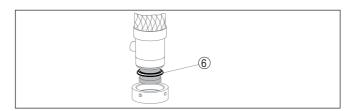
Mounting kit - scintillator cooling hose - bottom
